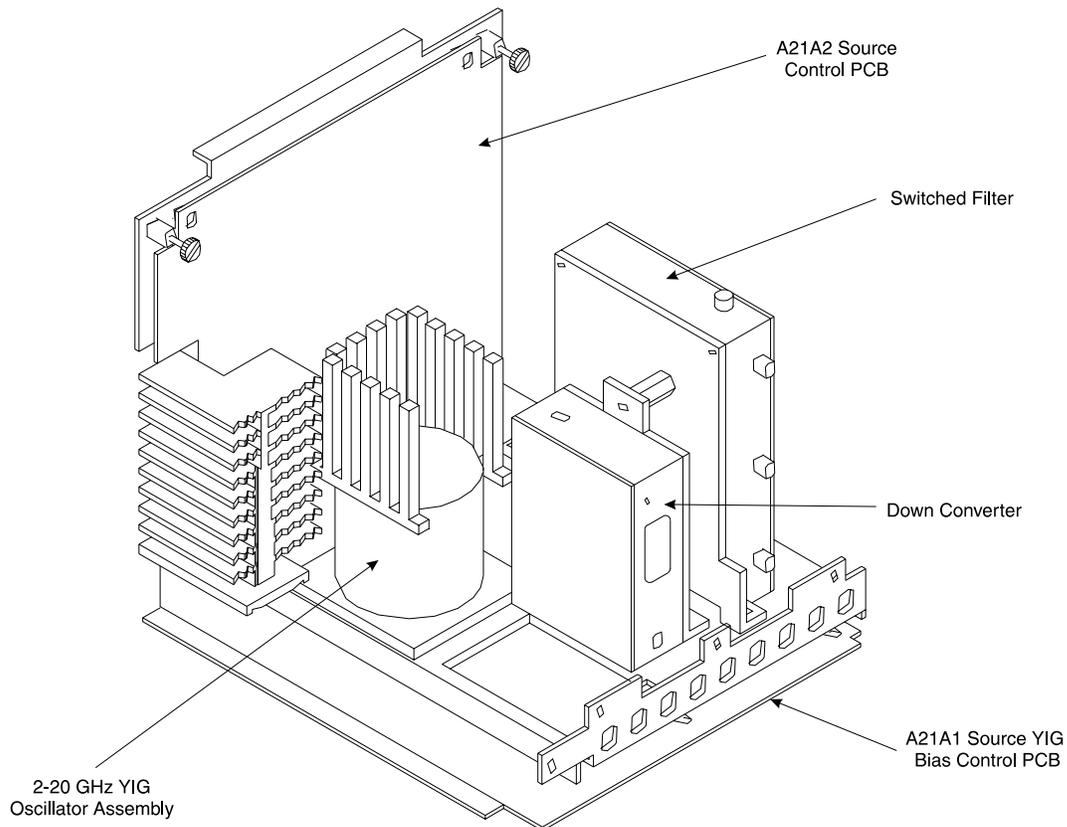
Signal Source Module Assemblies Removal Details
